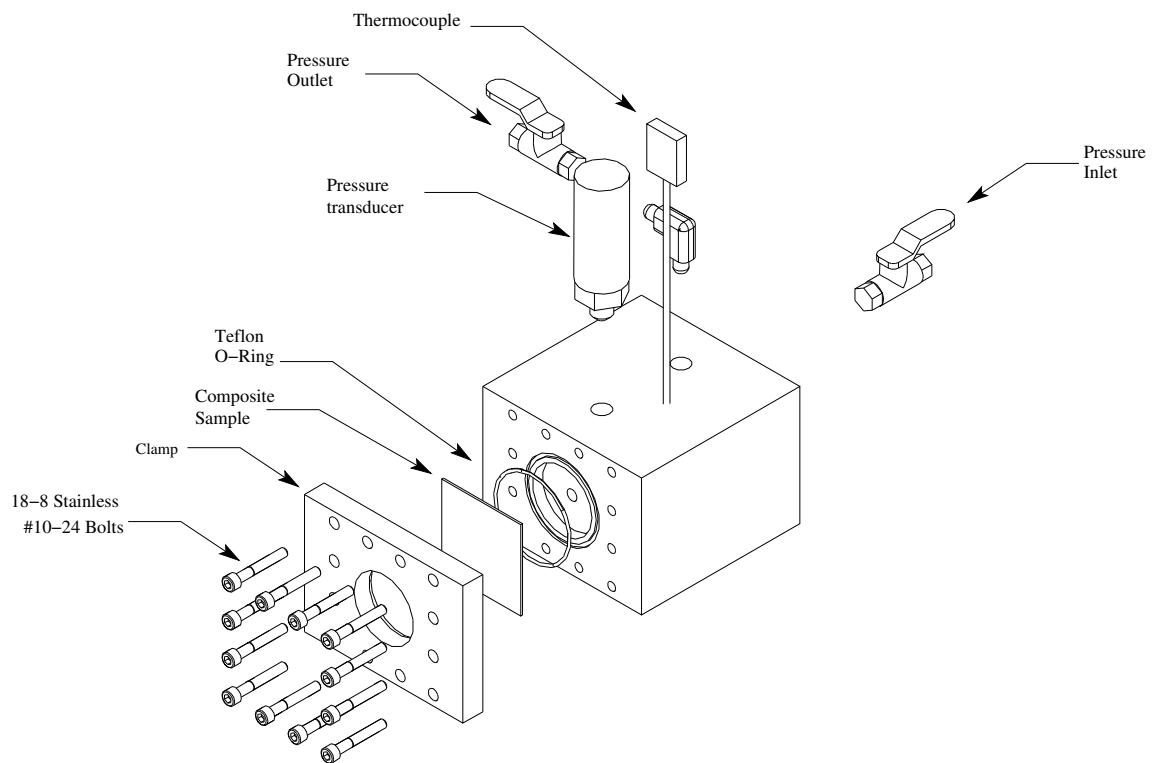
Assembly view of the bulge test fixture for evaluation of 2in x 2in composite samples
